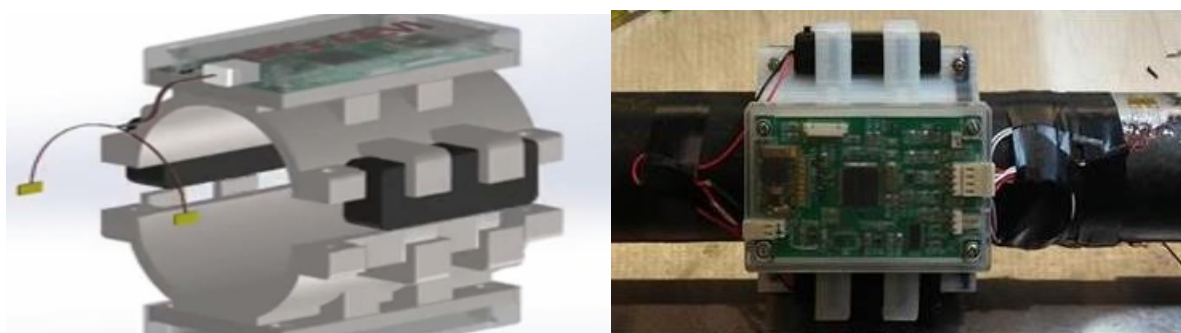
The torque sensor assembled in its housing (exploded view and photo)
